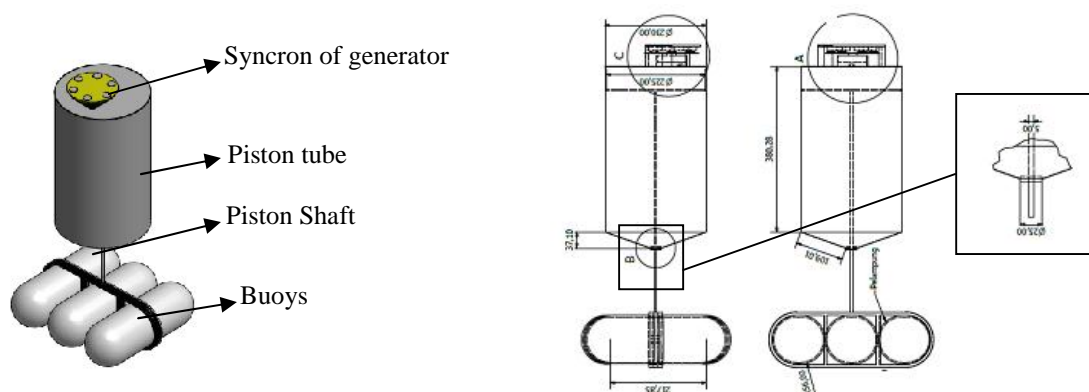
Piston and Generator Figure 2 Dimensions of Component Piston and
